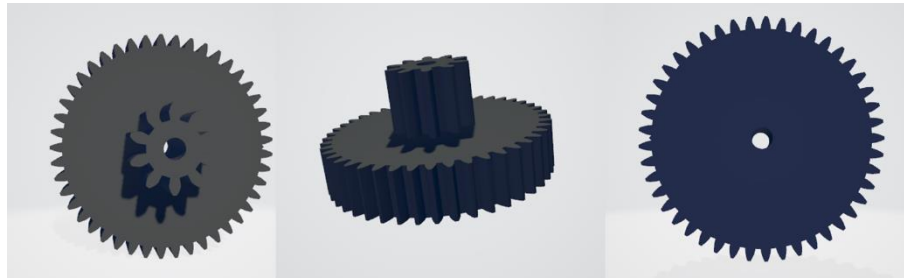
Scans of old gear for reconstruction or redrawing for the CAD modelling with existing design details.
